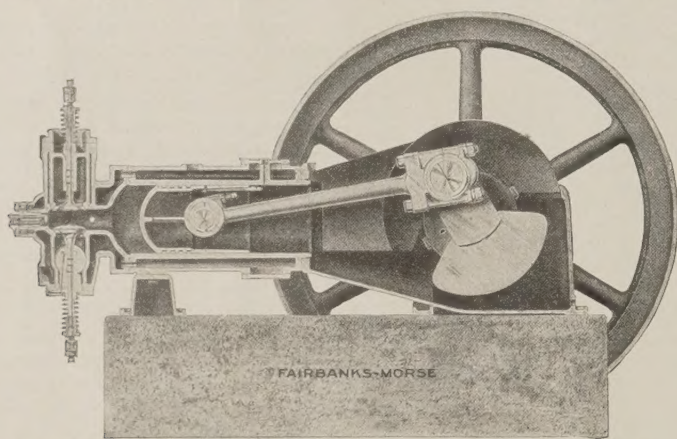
SECTIONAL VIEW OF HORIZONTAL TYPE PRODUCER GAS ENGINE.
